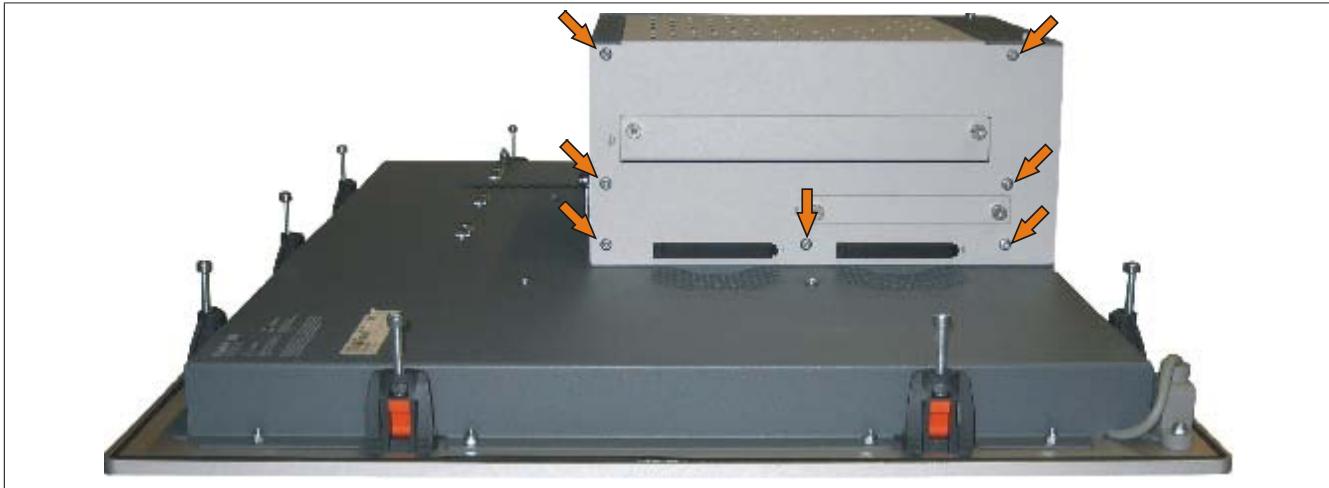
Mounting the side cover on a PPC800 with expansion (1 slot expansion shown in image)
